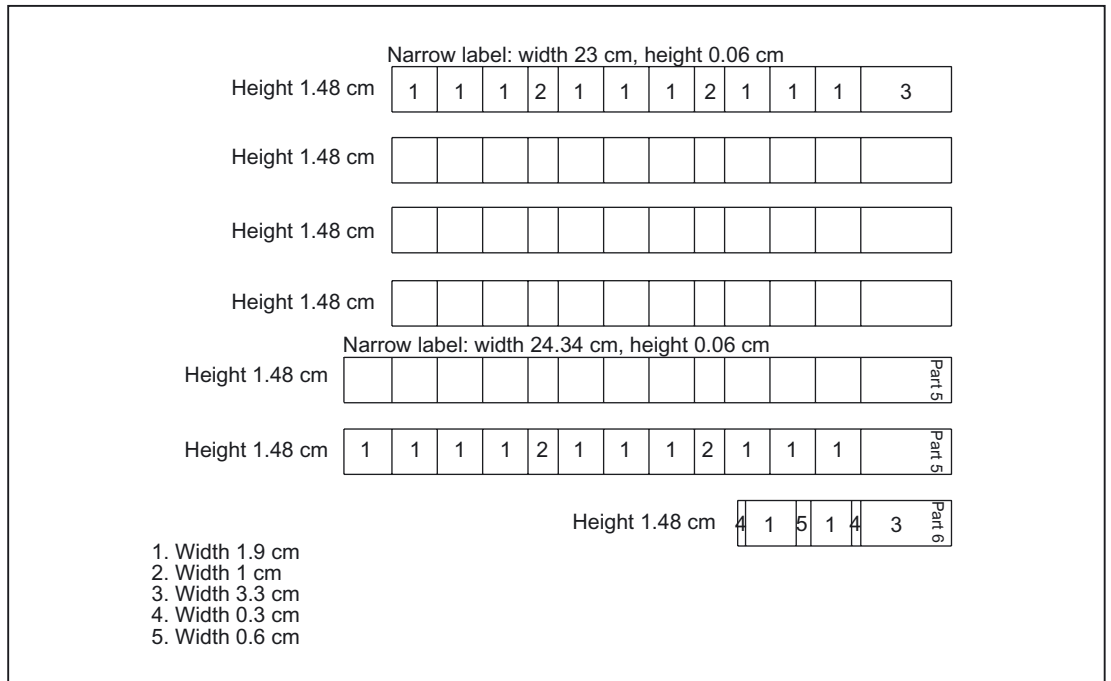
Dimension drawing for slide-in labels for MCP 483
